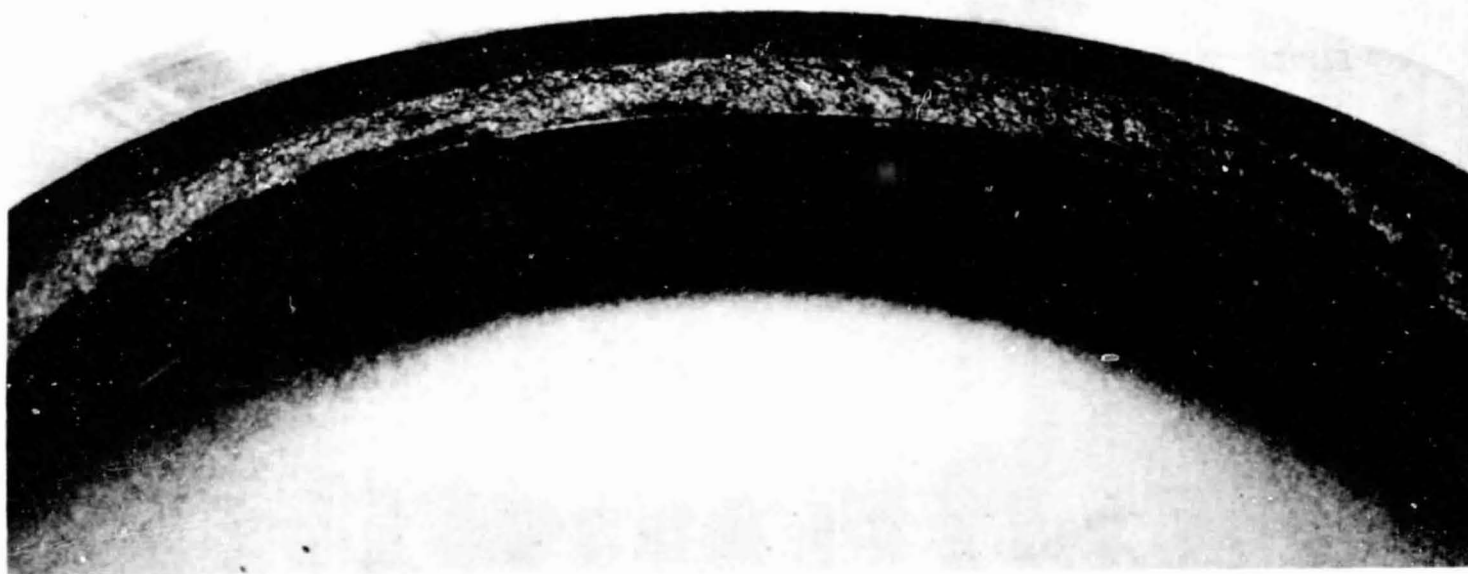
Pump End Primary Seal Ring Position 3, P/N 99RS010302,
